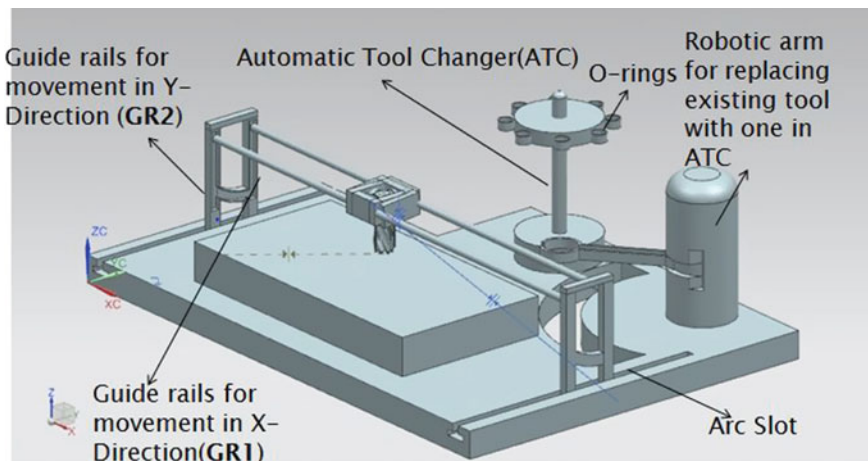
Proposed configuration for drilling and reaming using multipurpose cutting assembly
